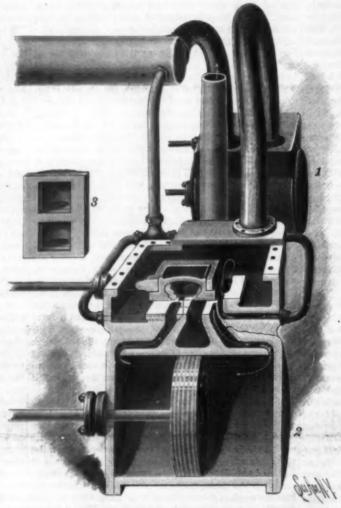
LONGITUDINAL SECTION THROUGH VALVE CHEST AND PORTS, LOW PRESSURE CYLINDER.
